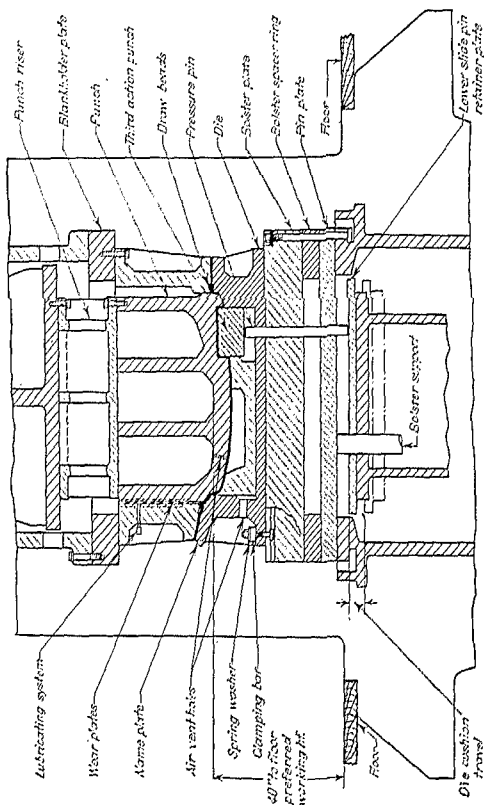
S. Typical die construction with a third-action punch for a large and irregularly shaped part.
